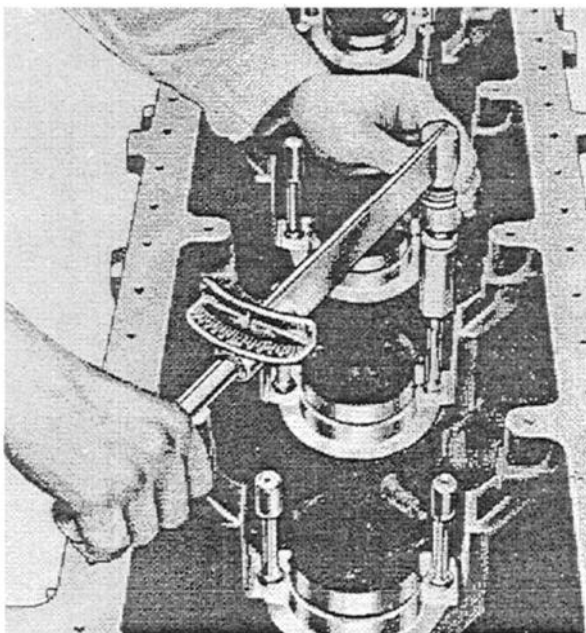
Torque wrench in use, tightening main bearing stud of an engine.
